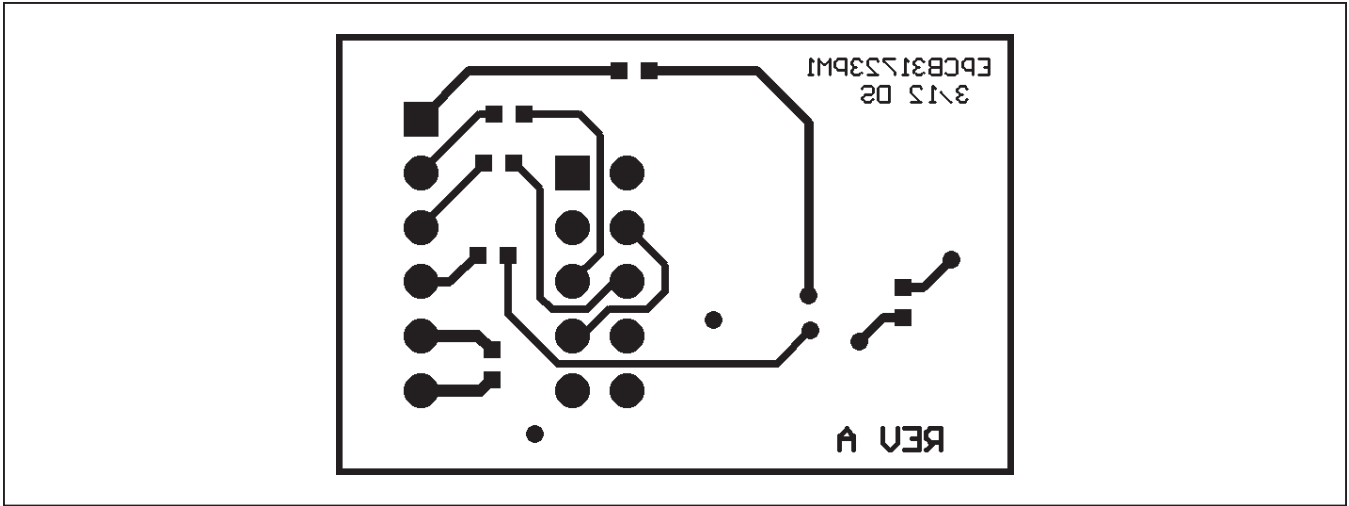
MAX31723PMB1 Peripheral Module PCB Layout—Solder Side
